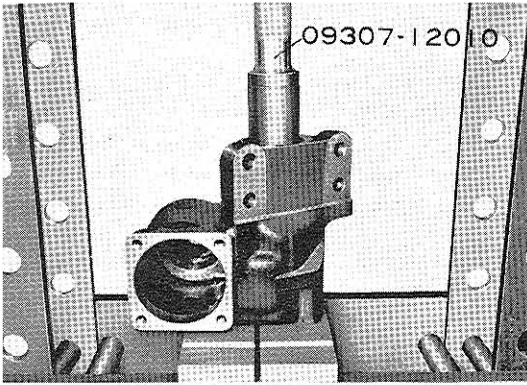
Removing Sector V5132 Shaft Bushing
